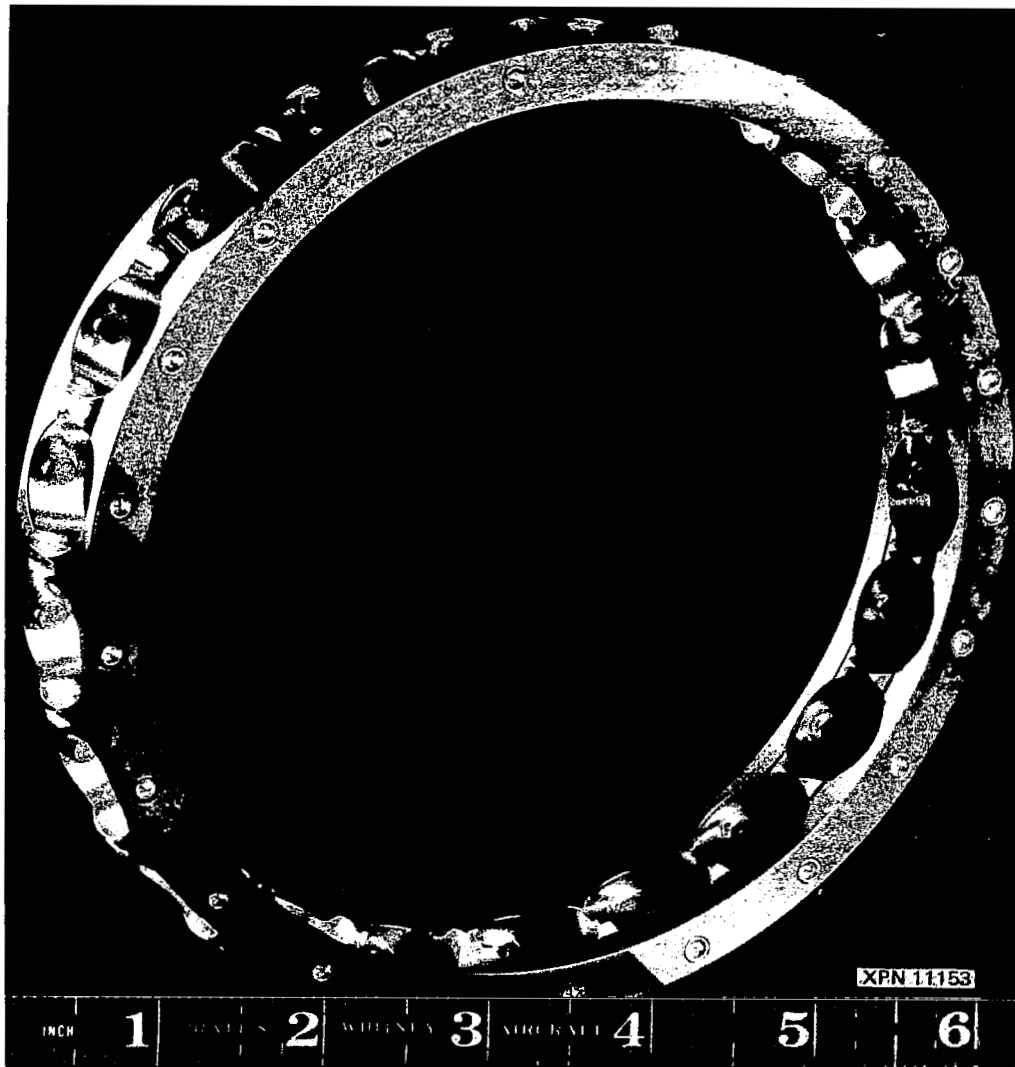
Drilled-Ball Bearing Cage with Pins Installed
